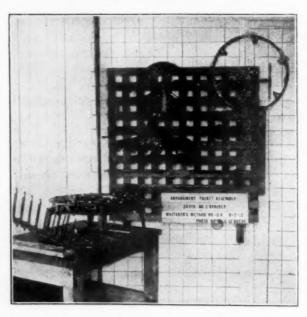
Typical Portable Assembly Bench against Packet with the Parts Arranged for Assembling a Braiding Machine
